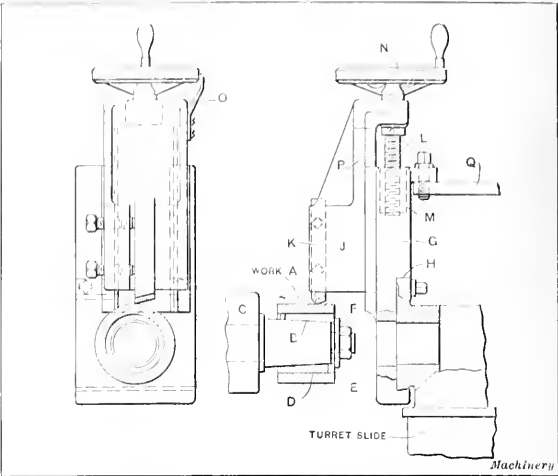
Adjustable Turning Tool for finishing the Outside of Short Bushings
